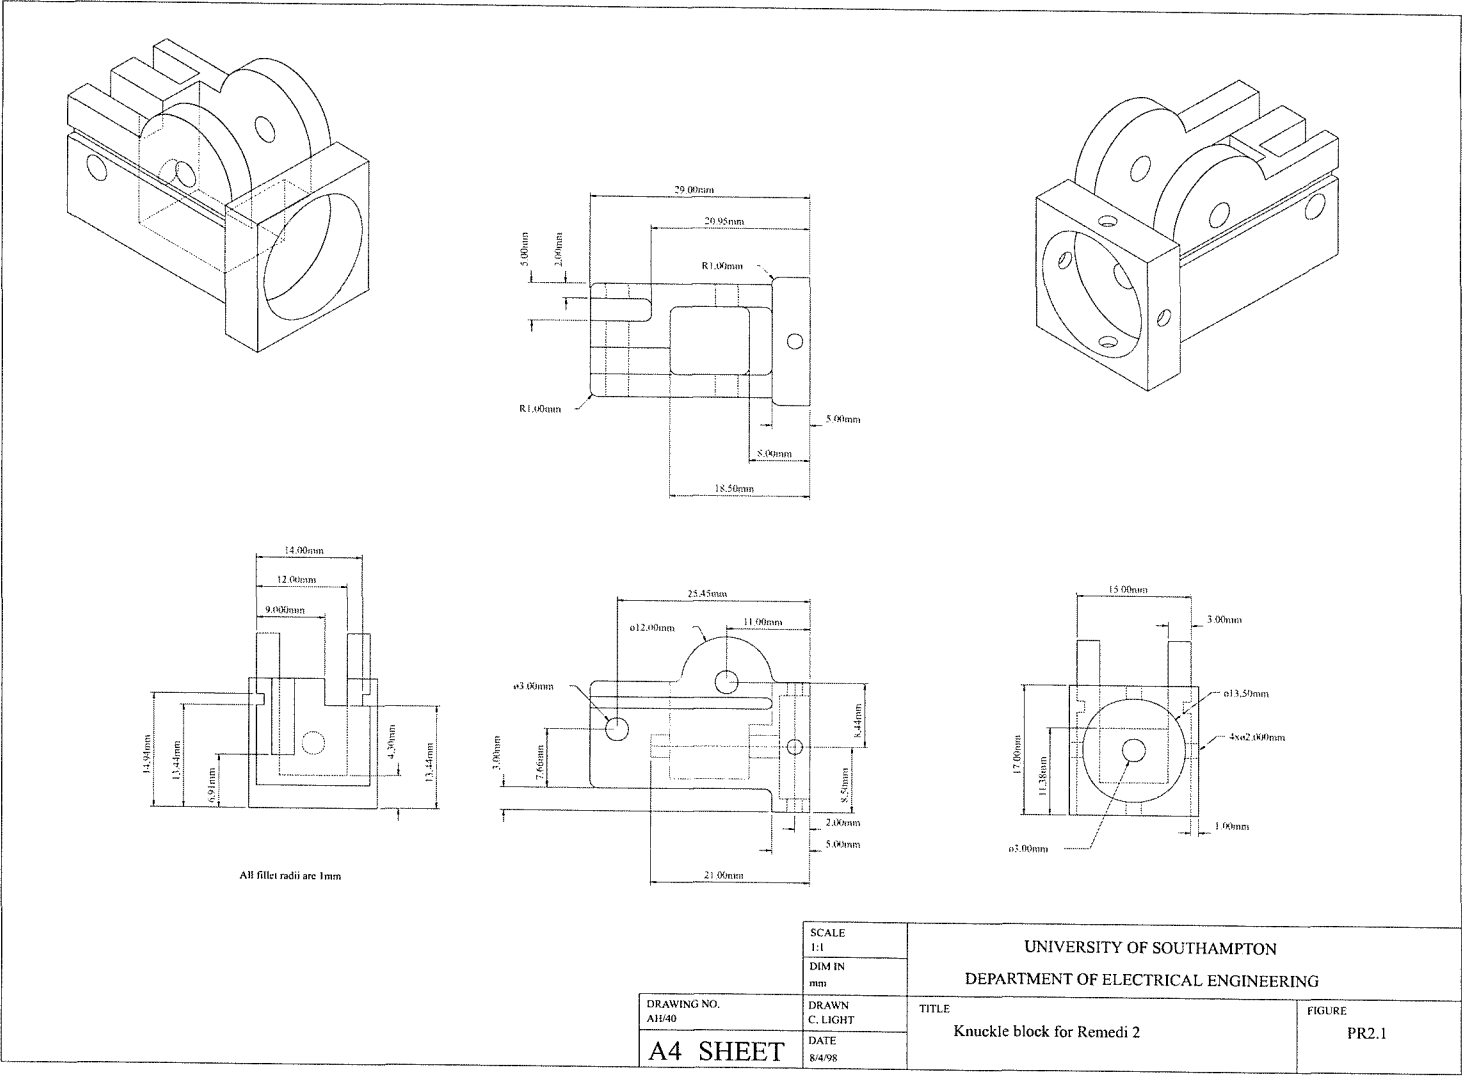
Knuckle Block for Southampton-Remedi Prototype
